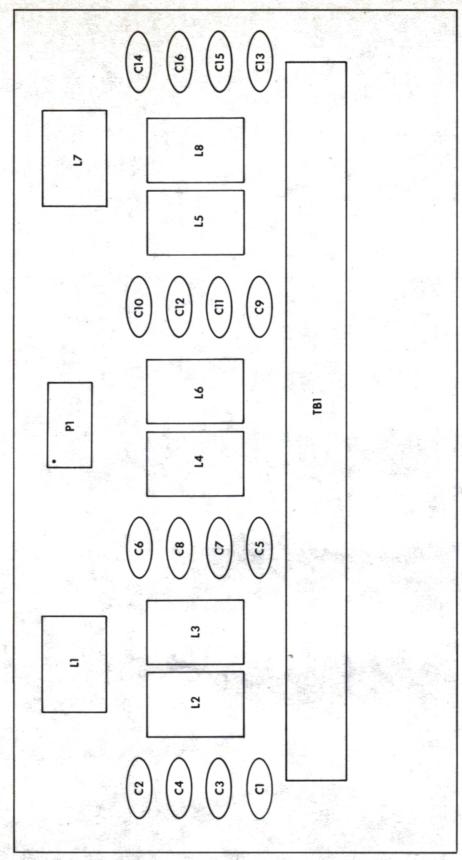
(SHEET 2 OF 2) AUDIO I/O BOARD COMPONENT LOCATION - 843 2213 001
